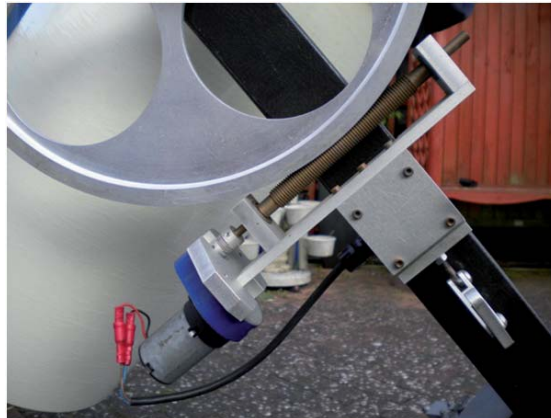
A DC motor and gearbox drive a 'worm' and wheel gear to adjust the north/south axis
